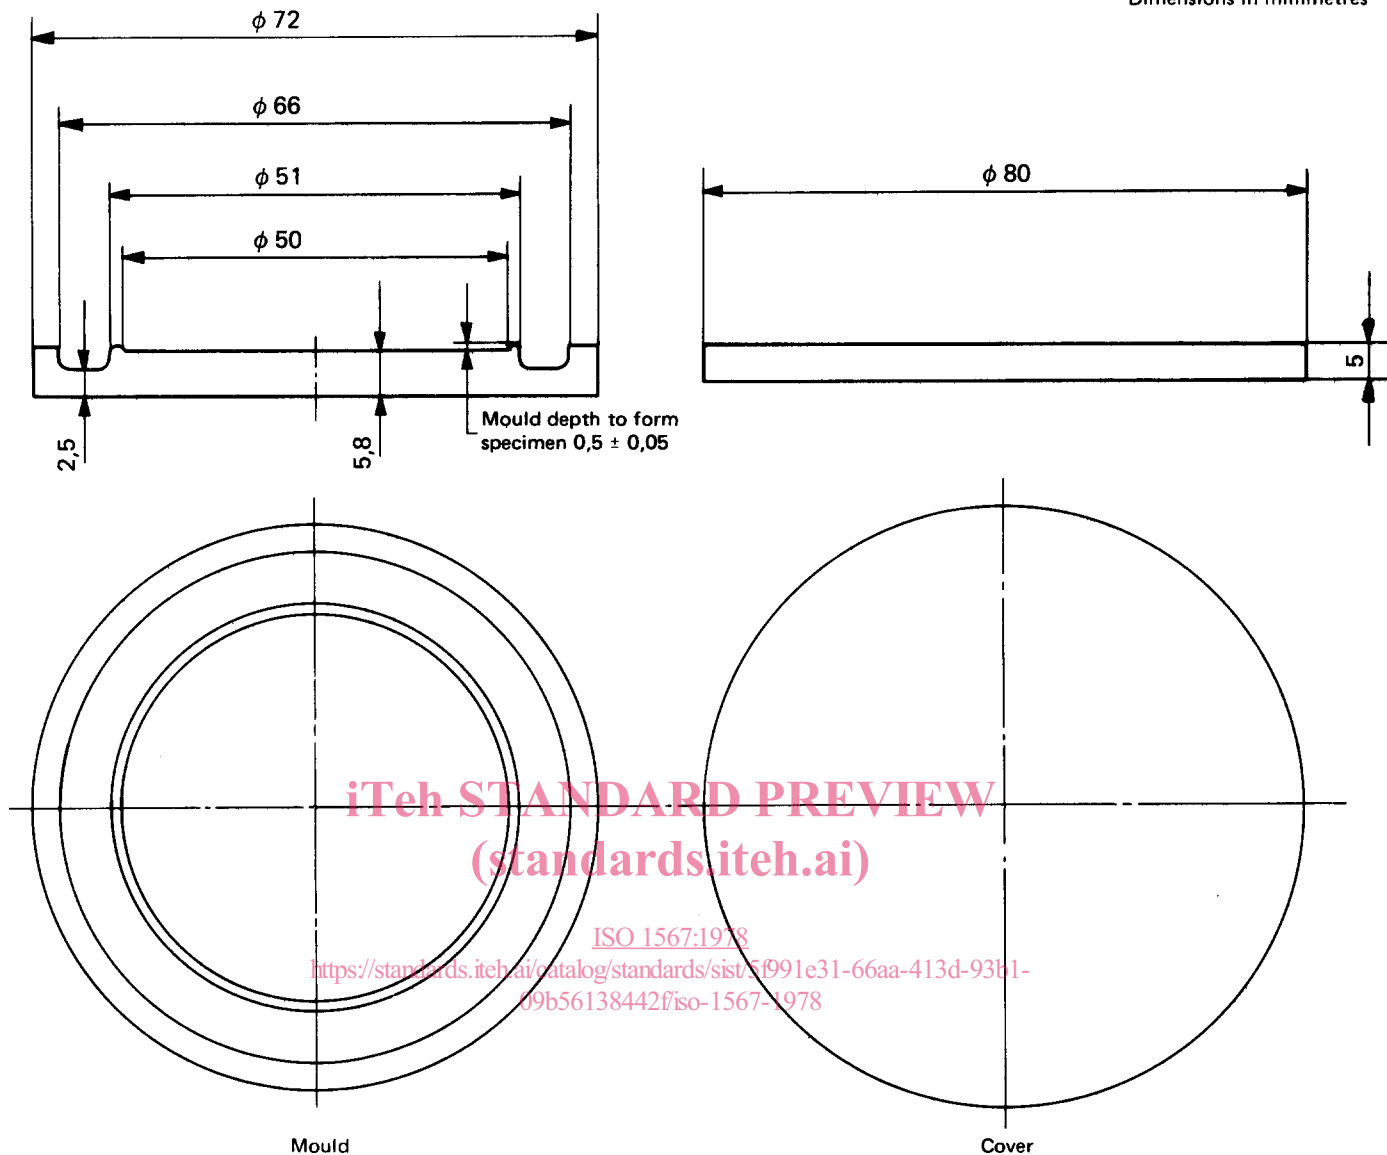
Stainless steel mould and cover for sorption and solubility specimens (see 7.2.1.1)
